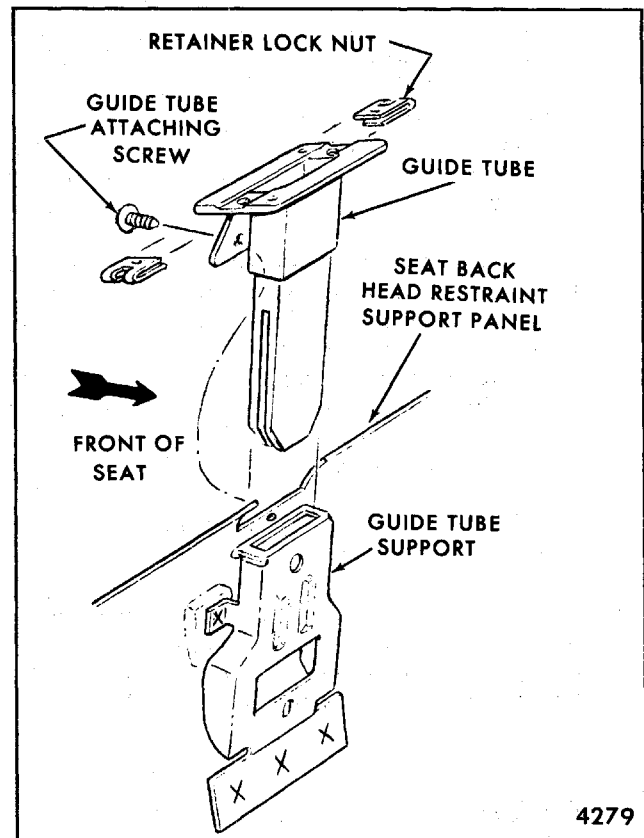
Head Restraint Guide Tube - "A, X and E" Styles
